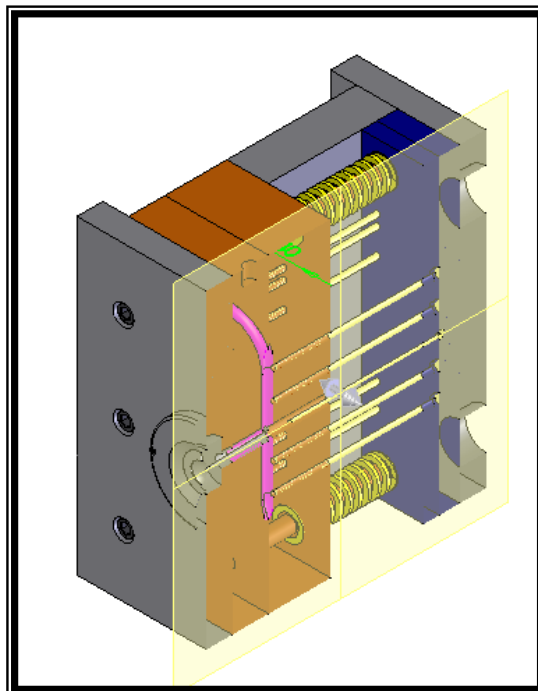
Isometric cross-section view of complete Two Plate Molds design
